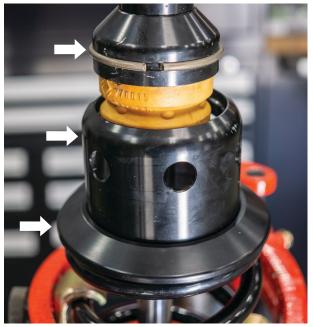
Remove the snap ring, spring riser, and spring retainer.
